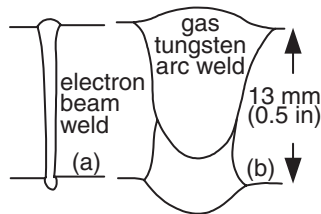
Welds in 13-mm-thick 2219 aluminum: (a) electron beam weld; (b) gas-tungsten arc weld. From Farrell (16).
